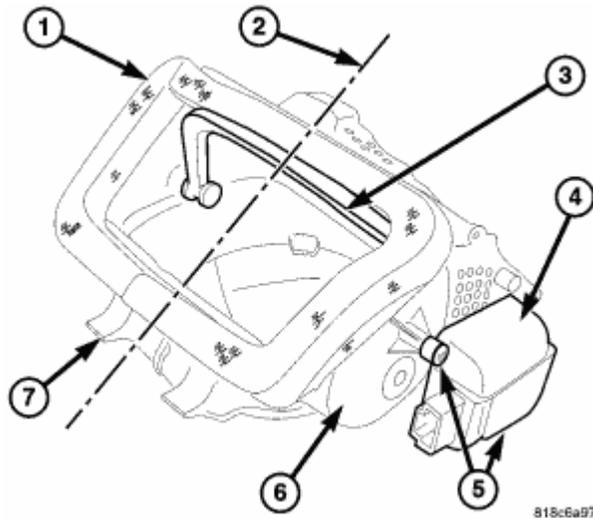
Foam Seal, Parting Line, Recirculation-Air Door, Recirculation Door Actuator, Screws & Air Inlet Housing
